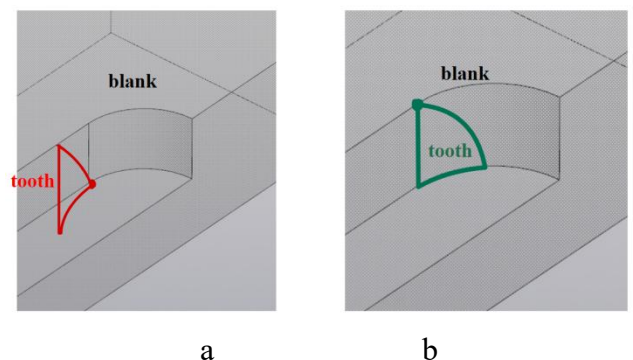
Scheme of contact of the cutter tooth with the workpiece before full penetration (a) and after full penetration (b)
